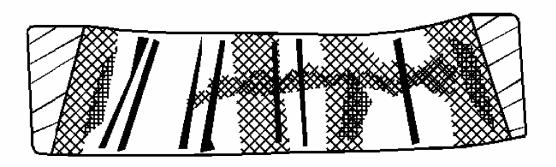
Identifying Cracked Inner Race Courtesy of GENERAL MOTORS CORP.
